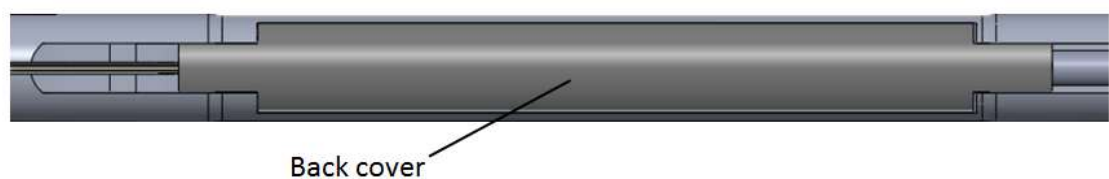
Back view of the back of the clutch-spring mechanism.
